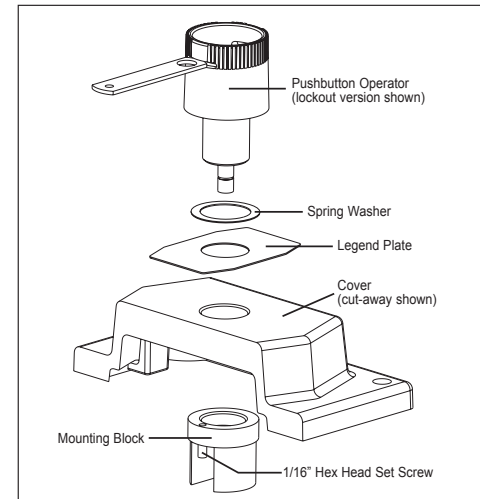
Assembly of Single Pushbutton Operator with One Contact Block
